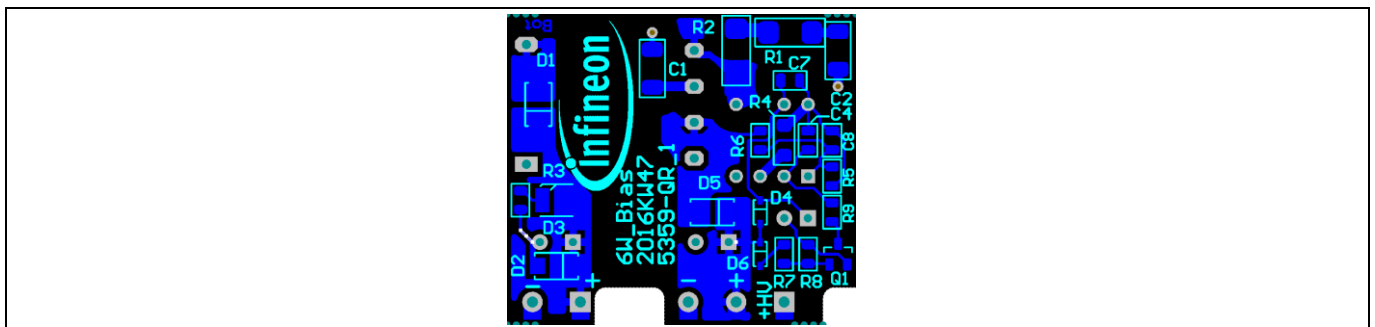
View of the auxiliary power supply daughter card – PCB bottom layer
